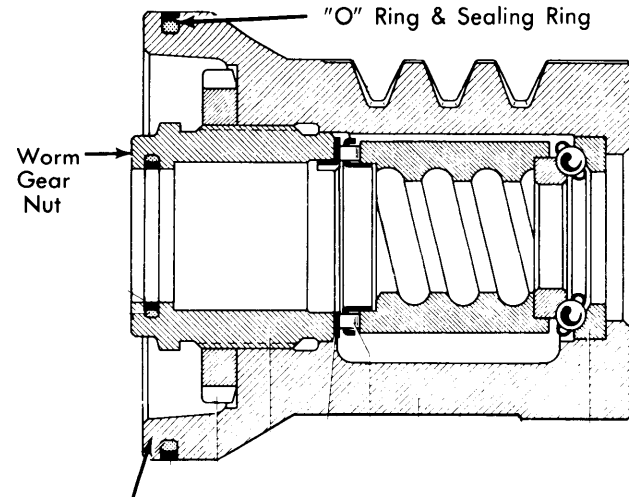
Cross-Sectional View of Piston/Steering Nut
